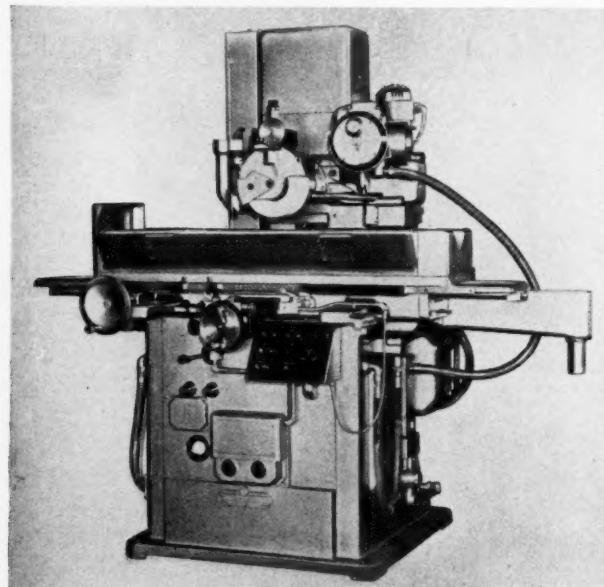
Jones-Shipman Automatic Crush Form Grinding Machine
